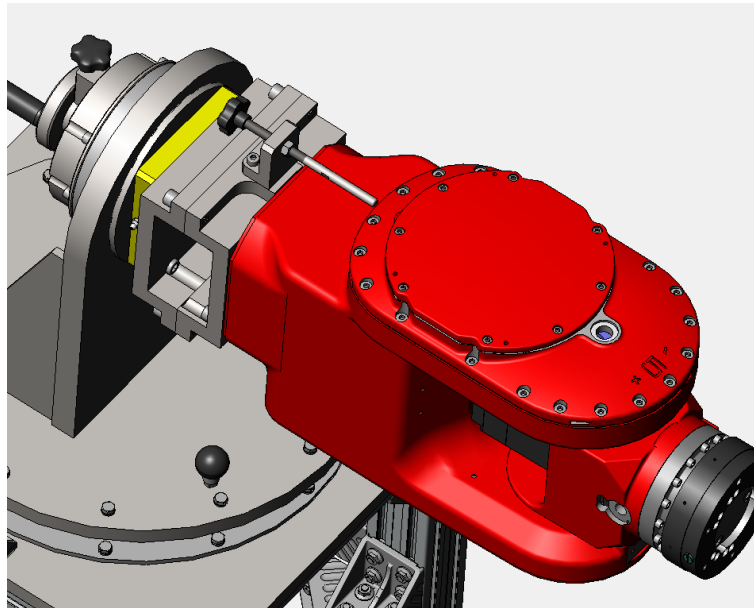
COMAU NJ 110 / 130 complete robot wrist on online assembly support / tool
